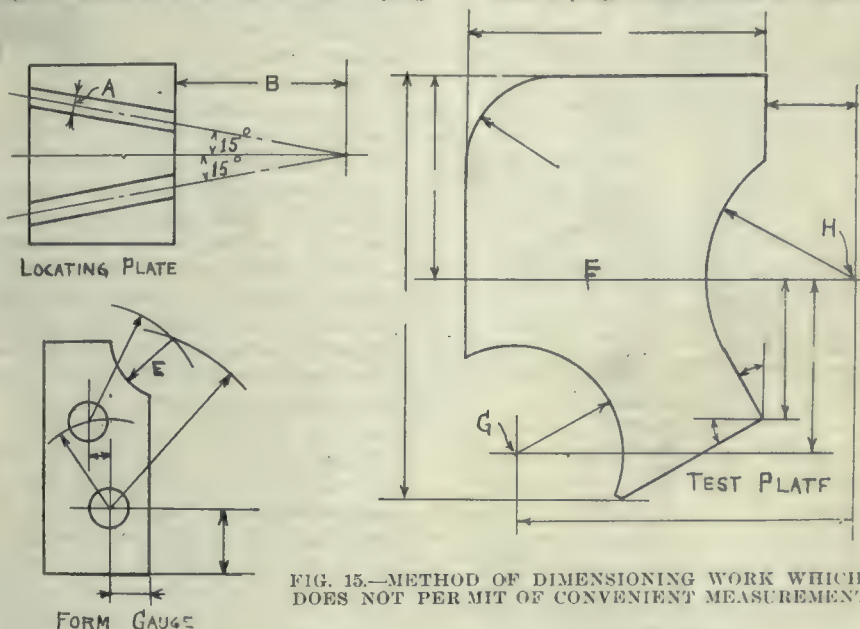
METHOD OF DIMENSIONING WORK WHICH DOES NOT PER MIT OF CONVENIENT MEASUREMENT
